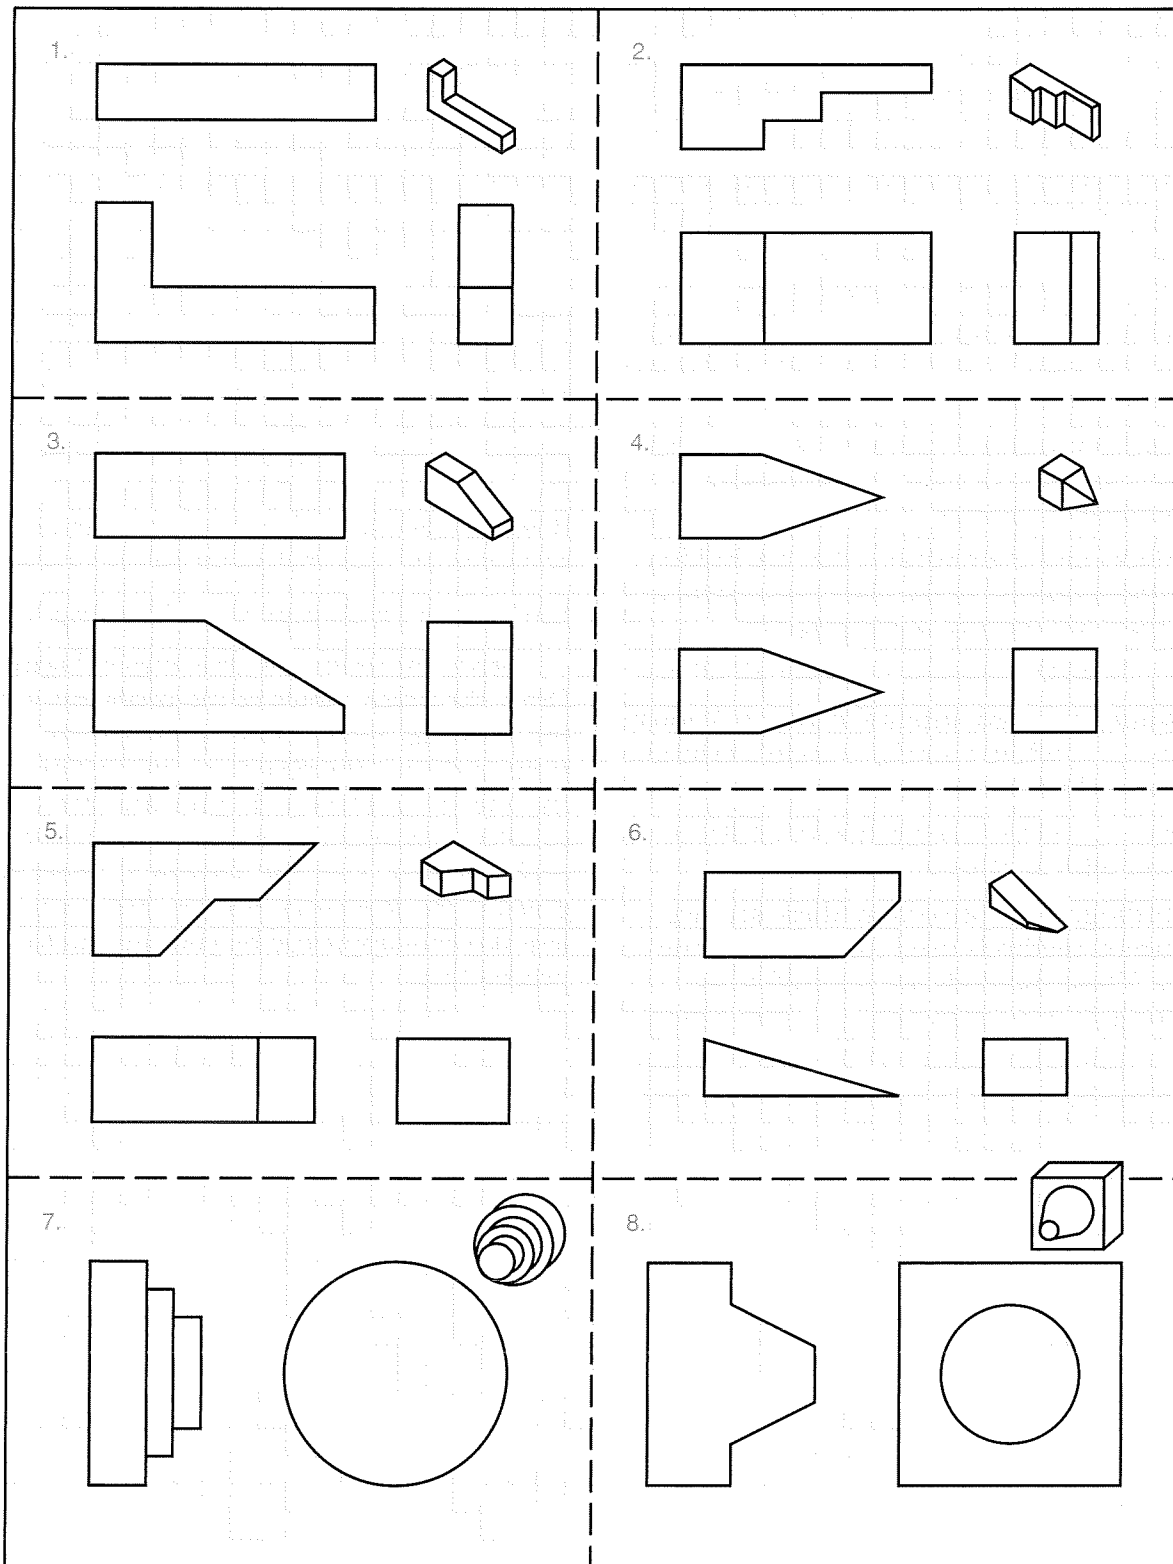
Shown are multiview drawings with missing lines in the views. Draw these problems and complete the views.
